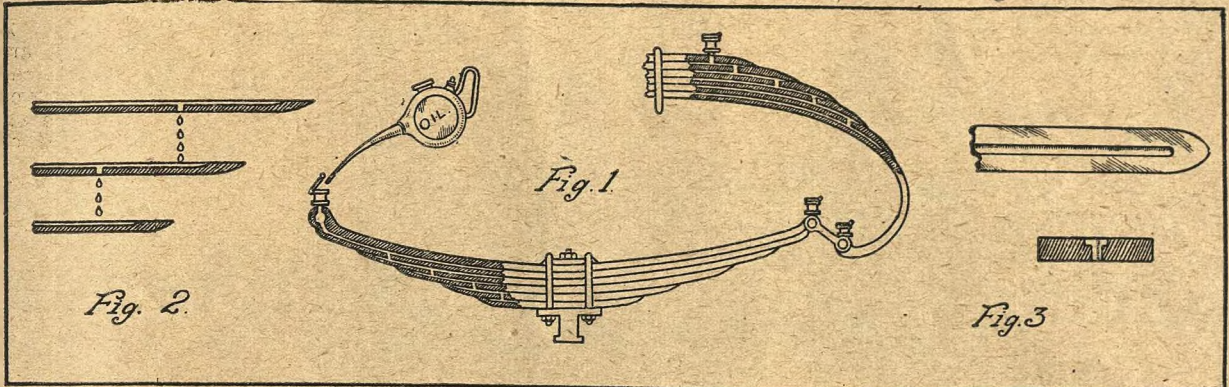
shows the system of lubrication suggested, and Figs. 2 and 3 details of the way it is carried out.
